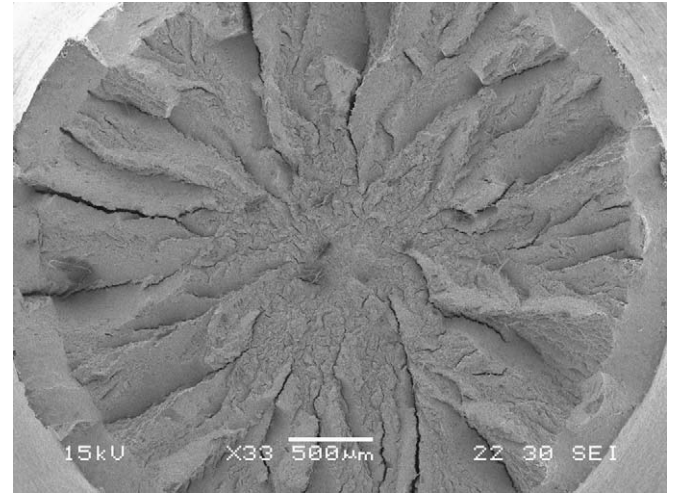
Fracture surfaces in the case of notched tensile specimens.
